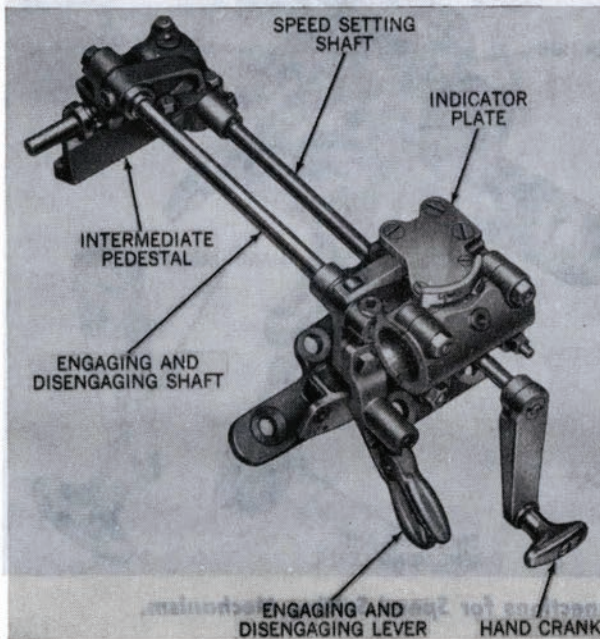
Cross-over Type Speed Setting Mechanism—Spindle IN—Hand Crank at HIGH.
